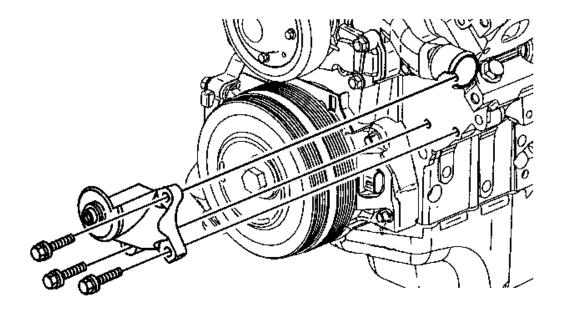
Identifying Drive Belt Idler Pulley - Lower Courtesy of GENERAL MOTORS CORP.
